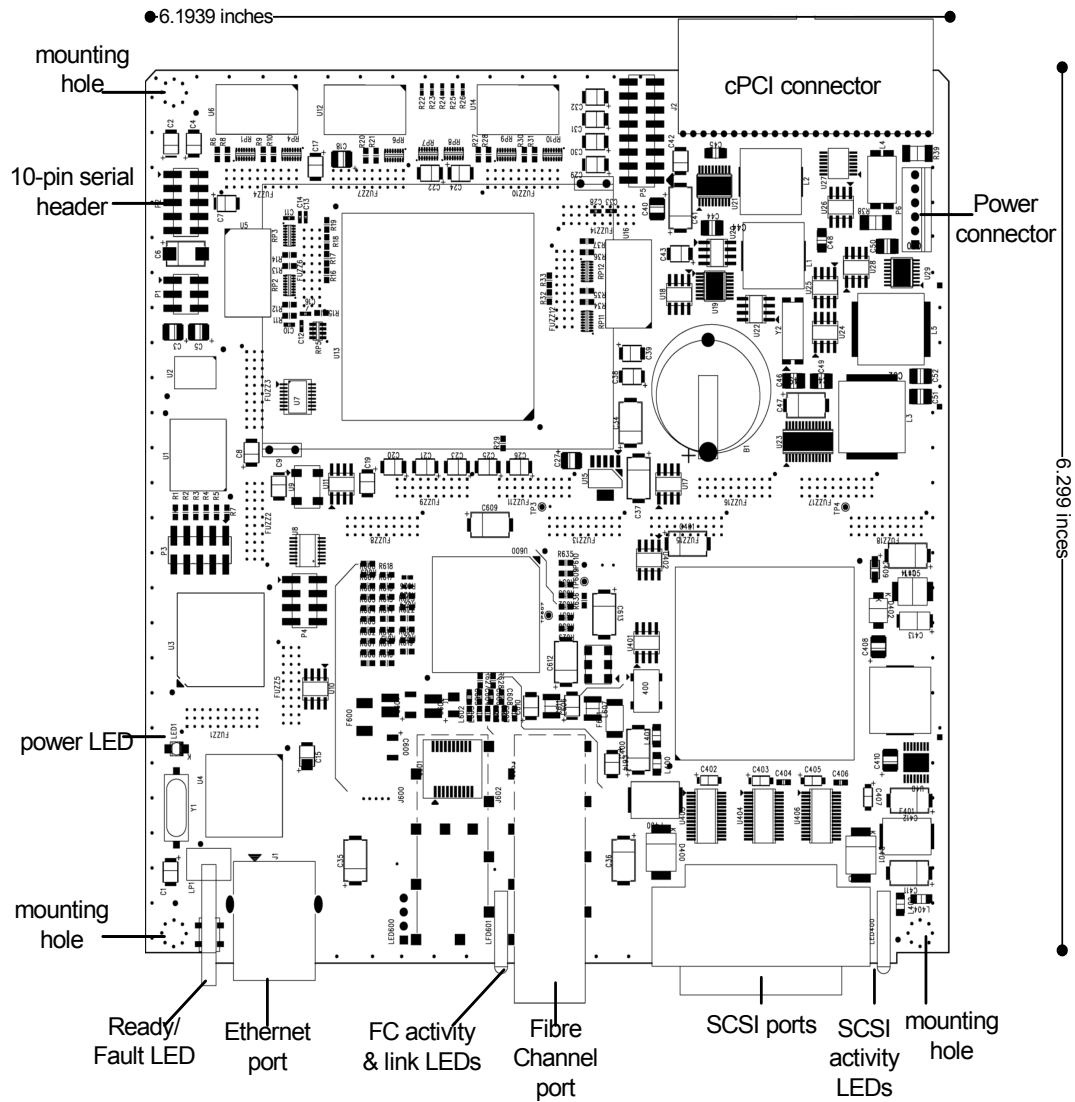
The FibreBridge 2390C board layout.
